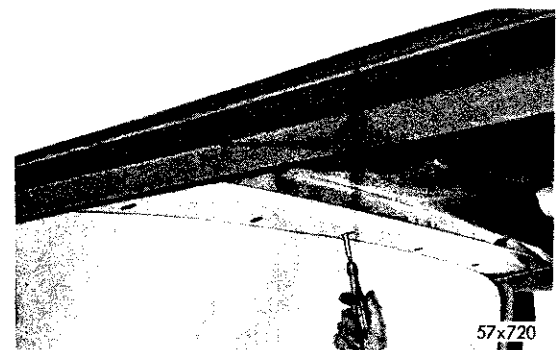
Removing or Installing Moulding Retaining Screws (Imperial Models)
